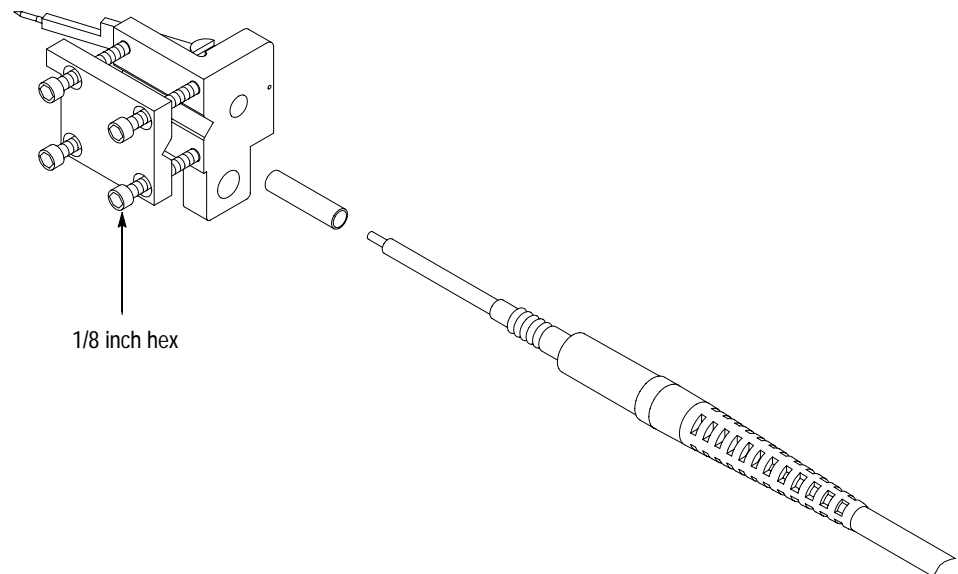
Securing General-Purpose Probe in the Ground Pin Assembly
